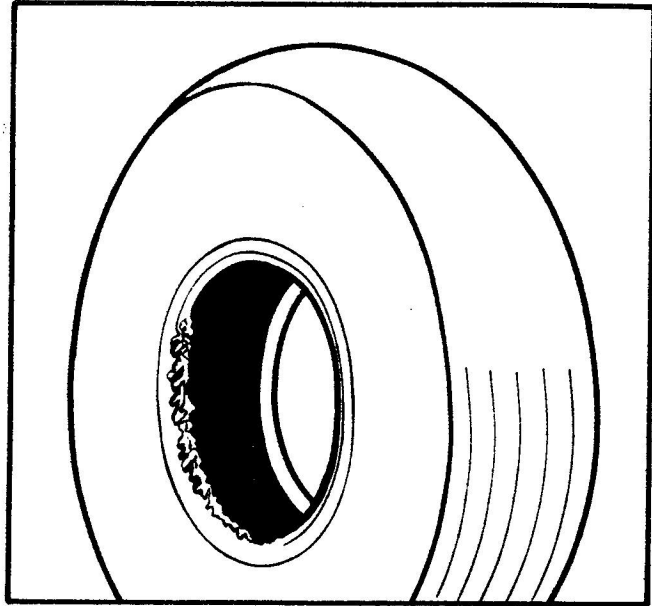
Damage on the Inside of a Tire Bead Due to Improper Tools or Use of Tools
